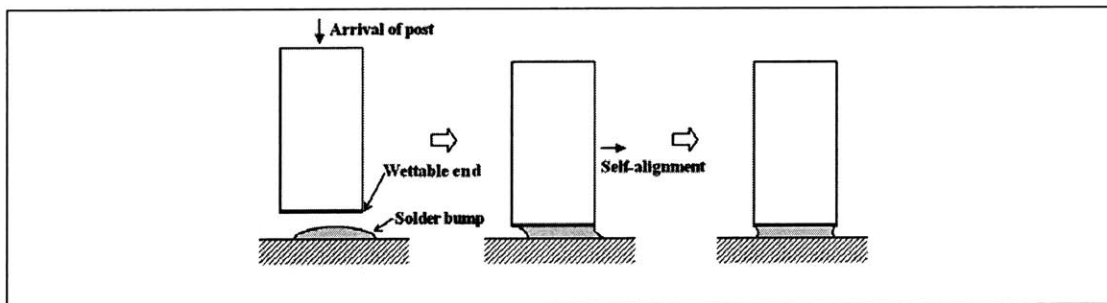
Schematic of how the solder self-assembly for the posts works
